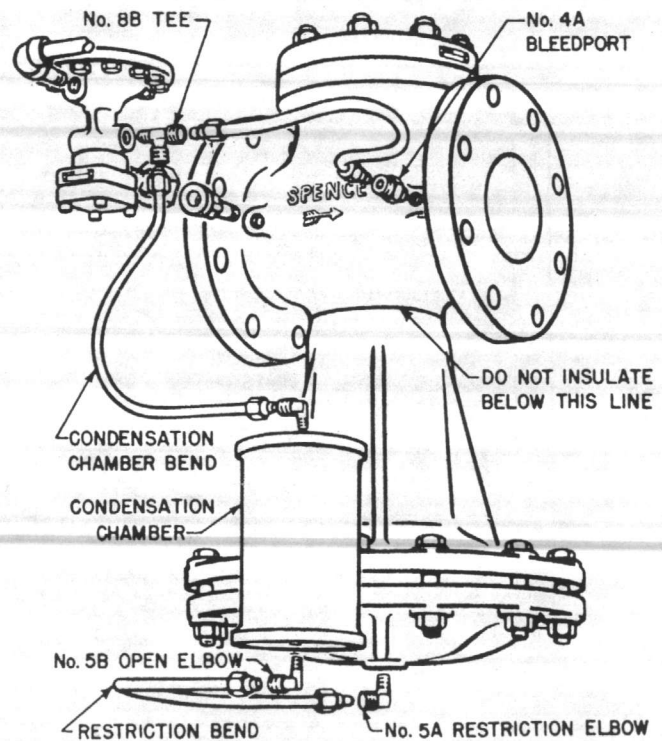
Regulator Assembly for Type E5 Main Valve with Condensation Chamber
